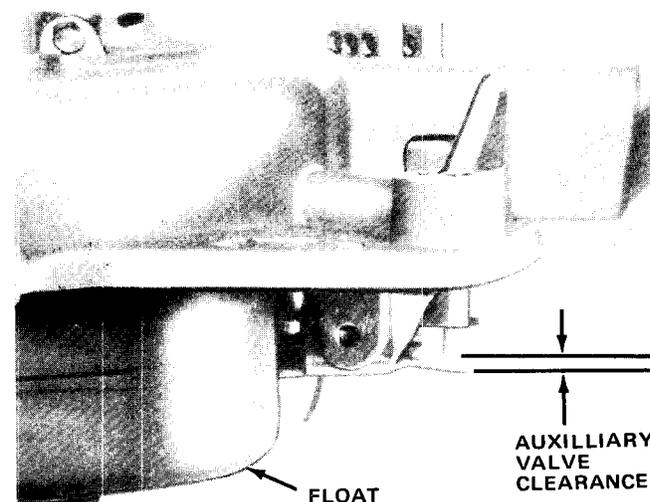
Auxiliary Inlet Valve Adjustment
